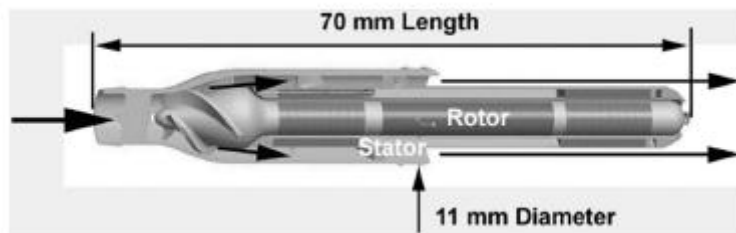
The cross sectional view of the Pedi Pump prototype
